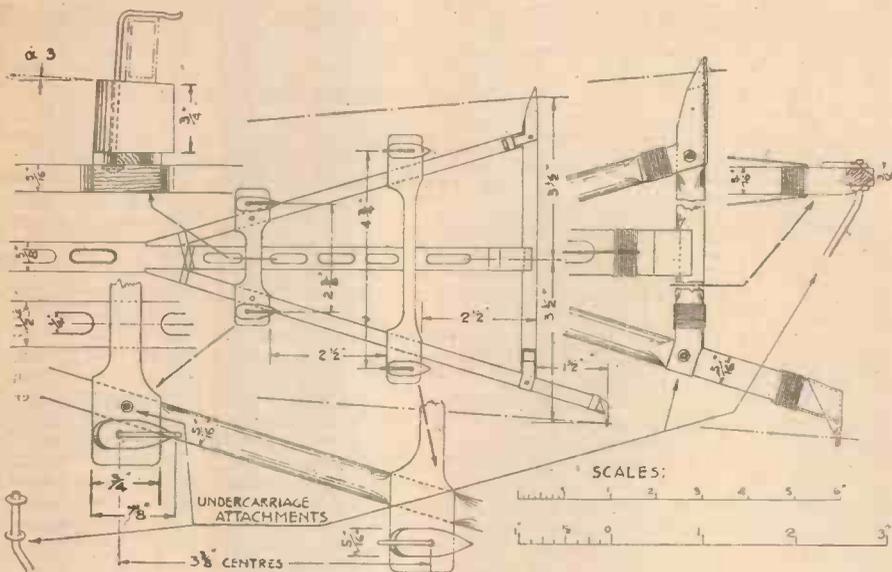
Details of propeller crossbar, main wing fastenings, etc.
